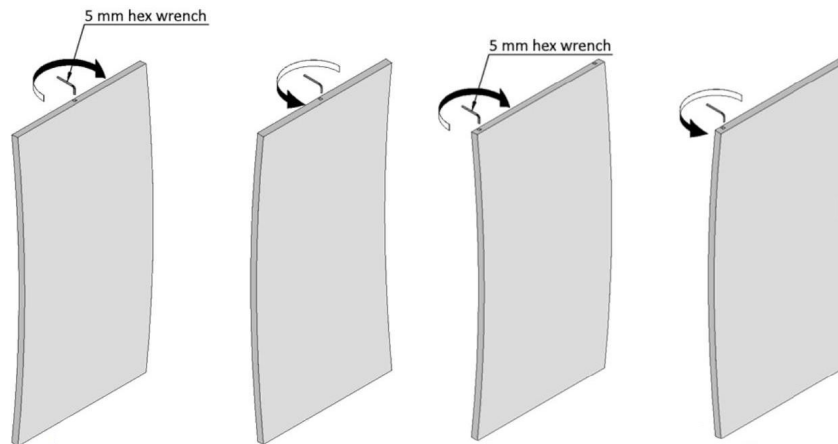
Door slab alignment using top/bottom edge screws (5 mm hex wrench)
